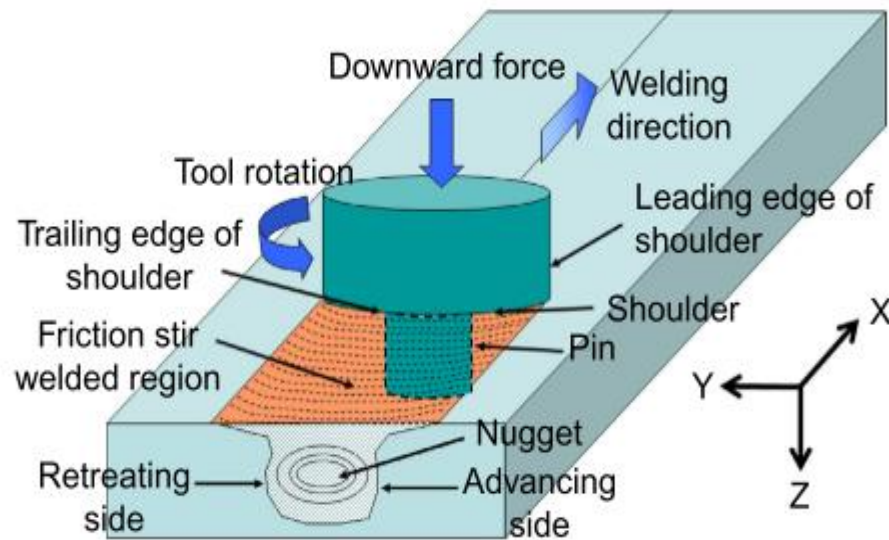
Schematic view of Friction Stir Welding
